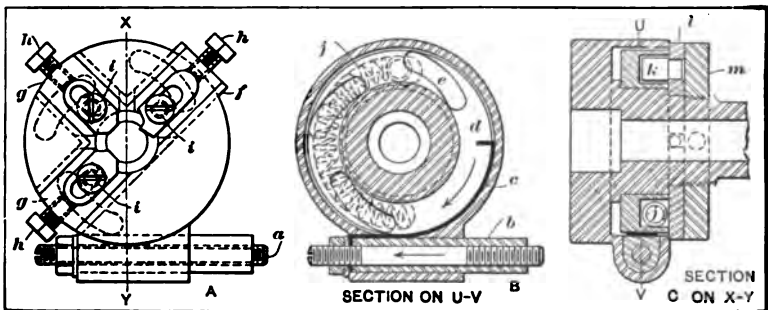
Details of Taper Turning Tool shown in Fig. 19
